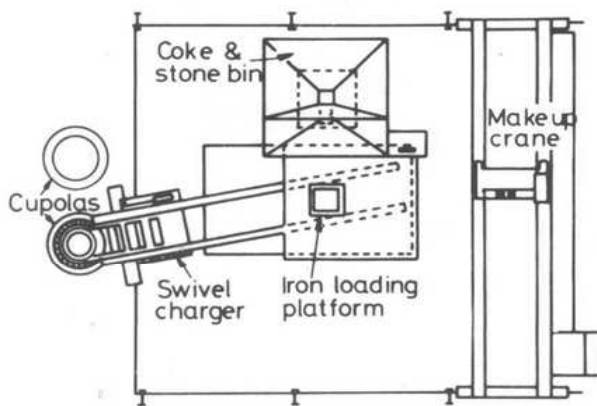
Make-up crane and weigh hopper used with swivel bucket charger.
